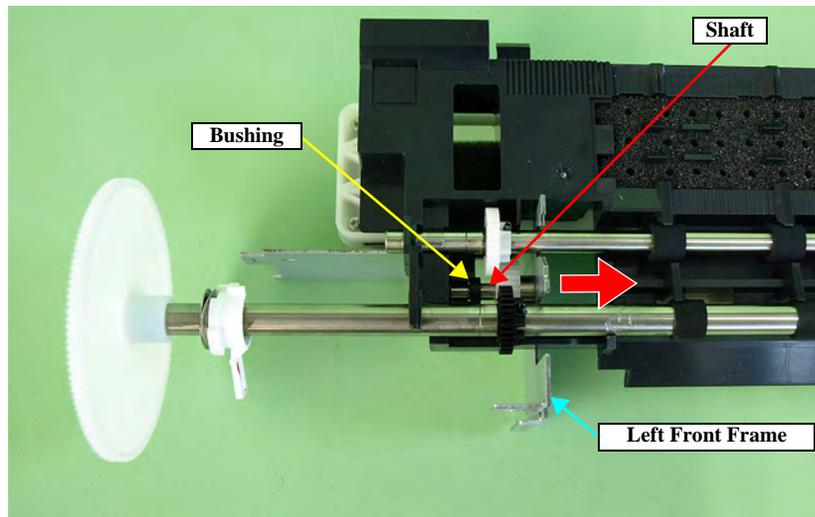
Removing the Front Paper Guide/Paper EJ Rollers (2)
